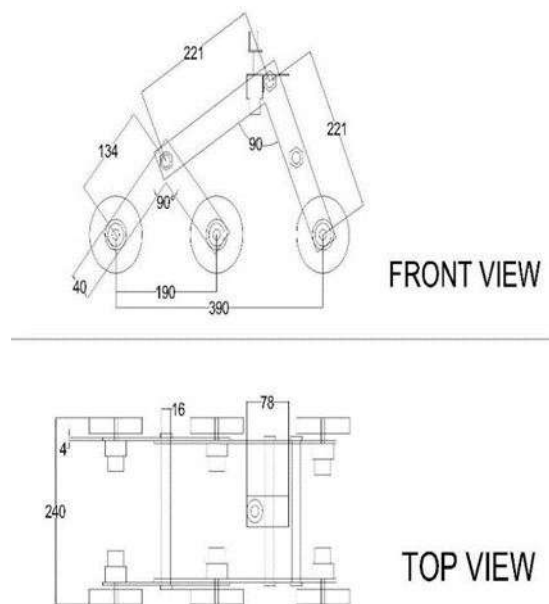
2D Drawing of Rocker Bogie Mechanism
